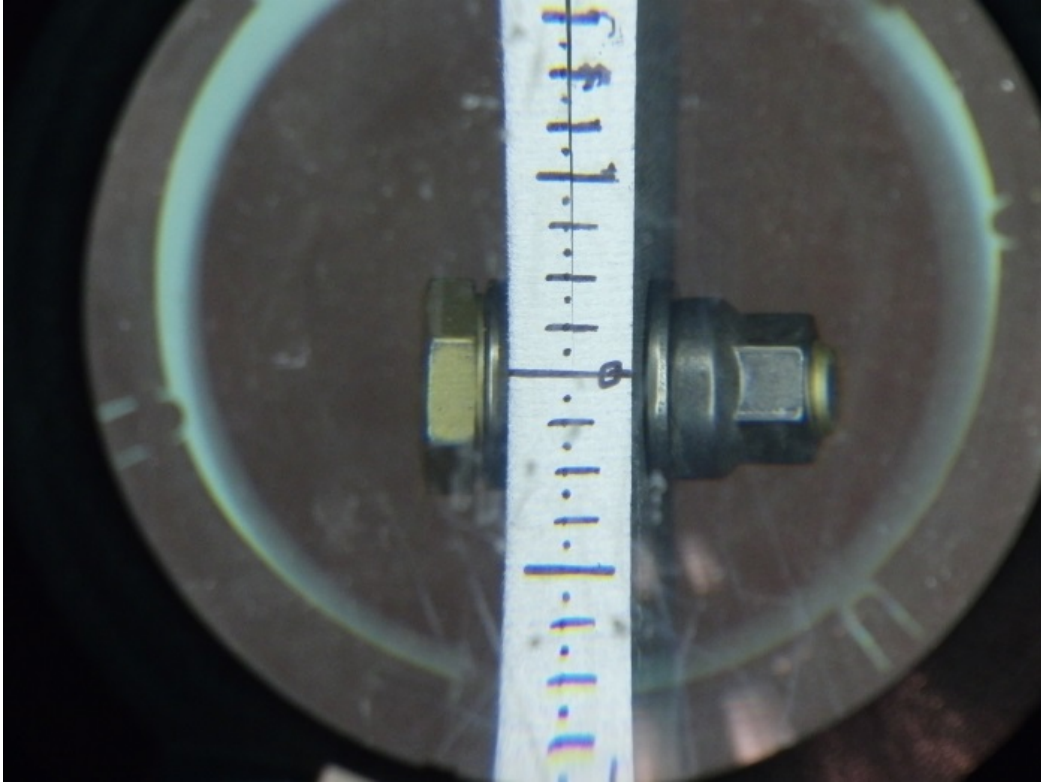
Visual tracking of crack-tip location—crack arrested at the fastener [3]
